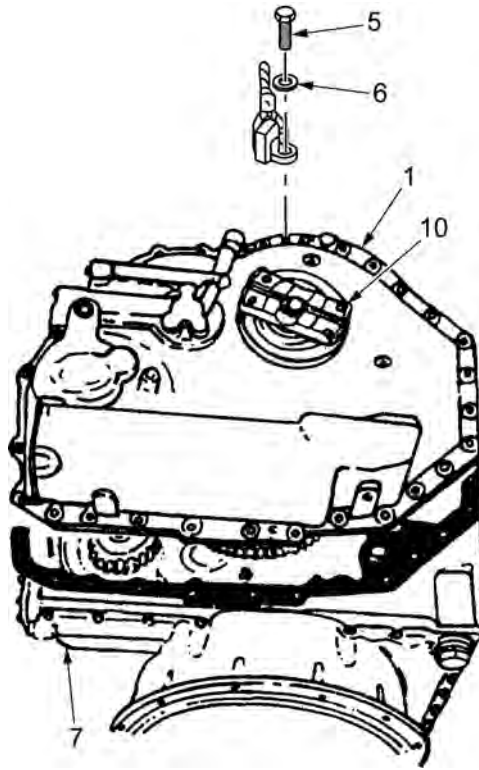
Left Cover Assembly Placement on Center Housing Assembly.
